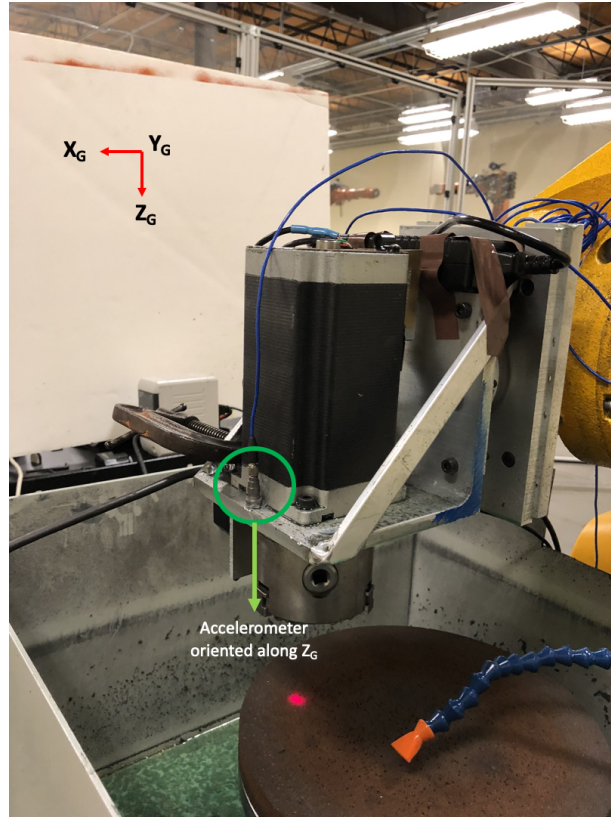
Uniaxial accelerometer mounting for measurement of FRF along Z_G (axes shown is the global frame attached to robot base).
